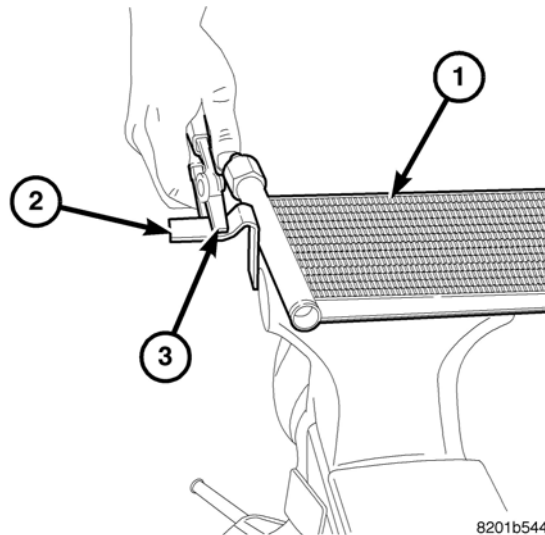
BENDING LEFT TRANSMISSION COOLER BRACKET
